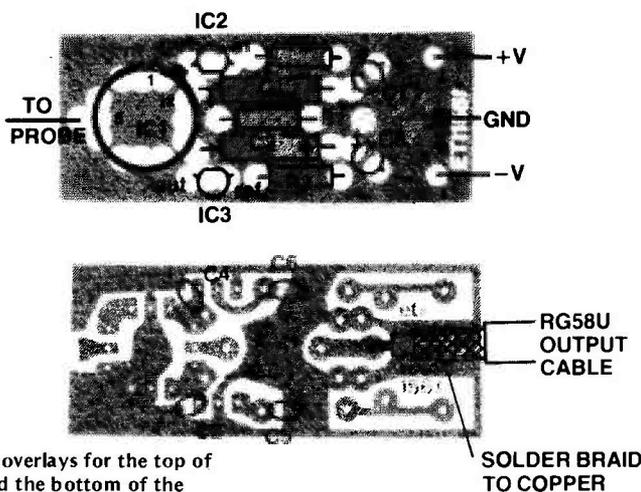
Component overlays for the top of the board (top) and the bottom of the board (bottom!).
